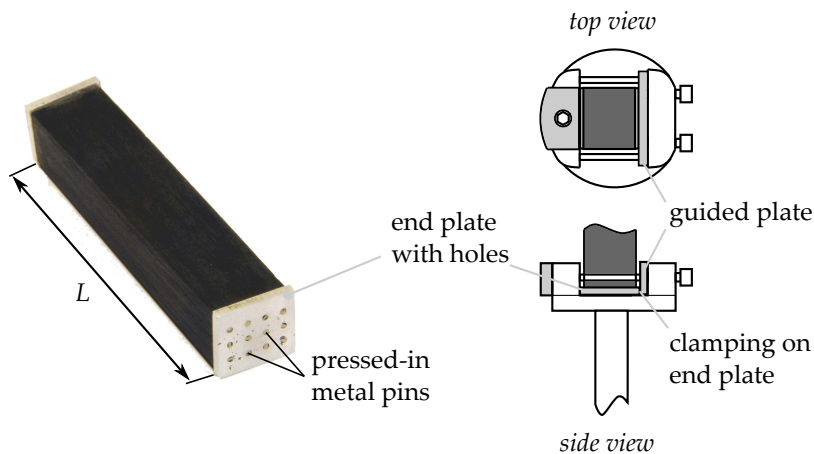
Alternative fixture with short metal pins to conduct the torsional loads. The standard SRF-12 fixtures are used to clamp the aluminium end plates.
